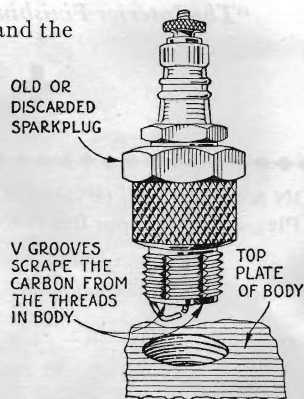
Using an old spark plug to remove carbon from threads of spark plug hole.
